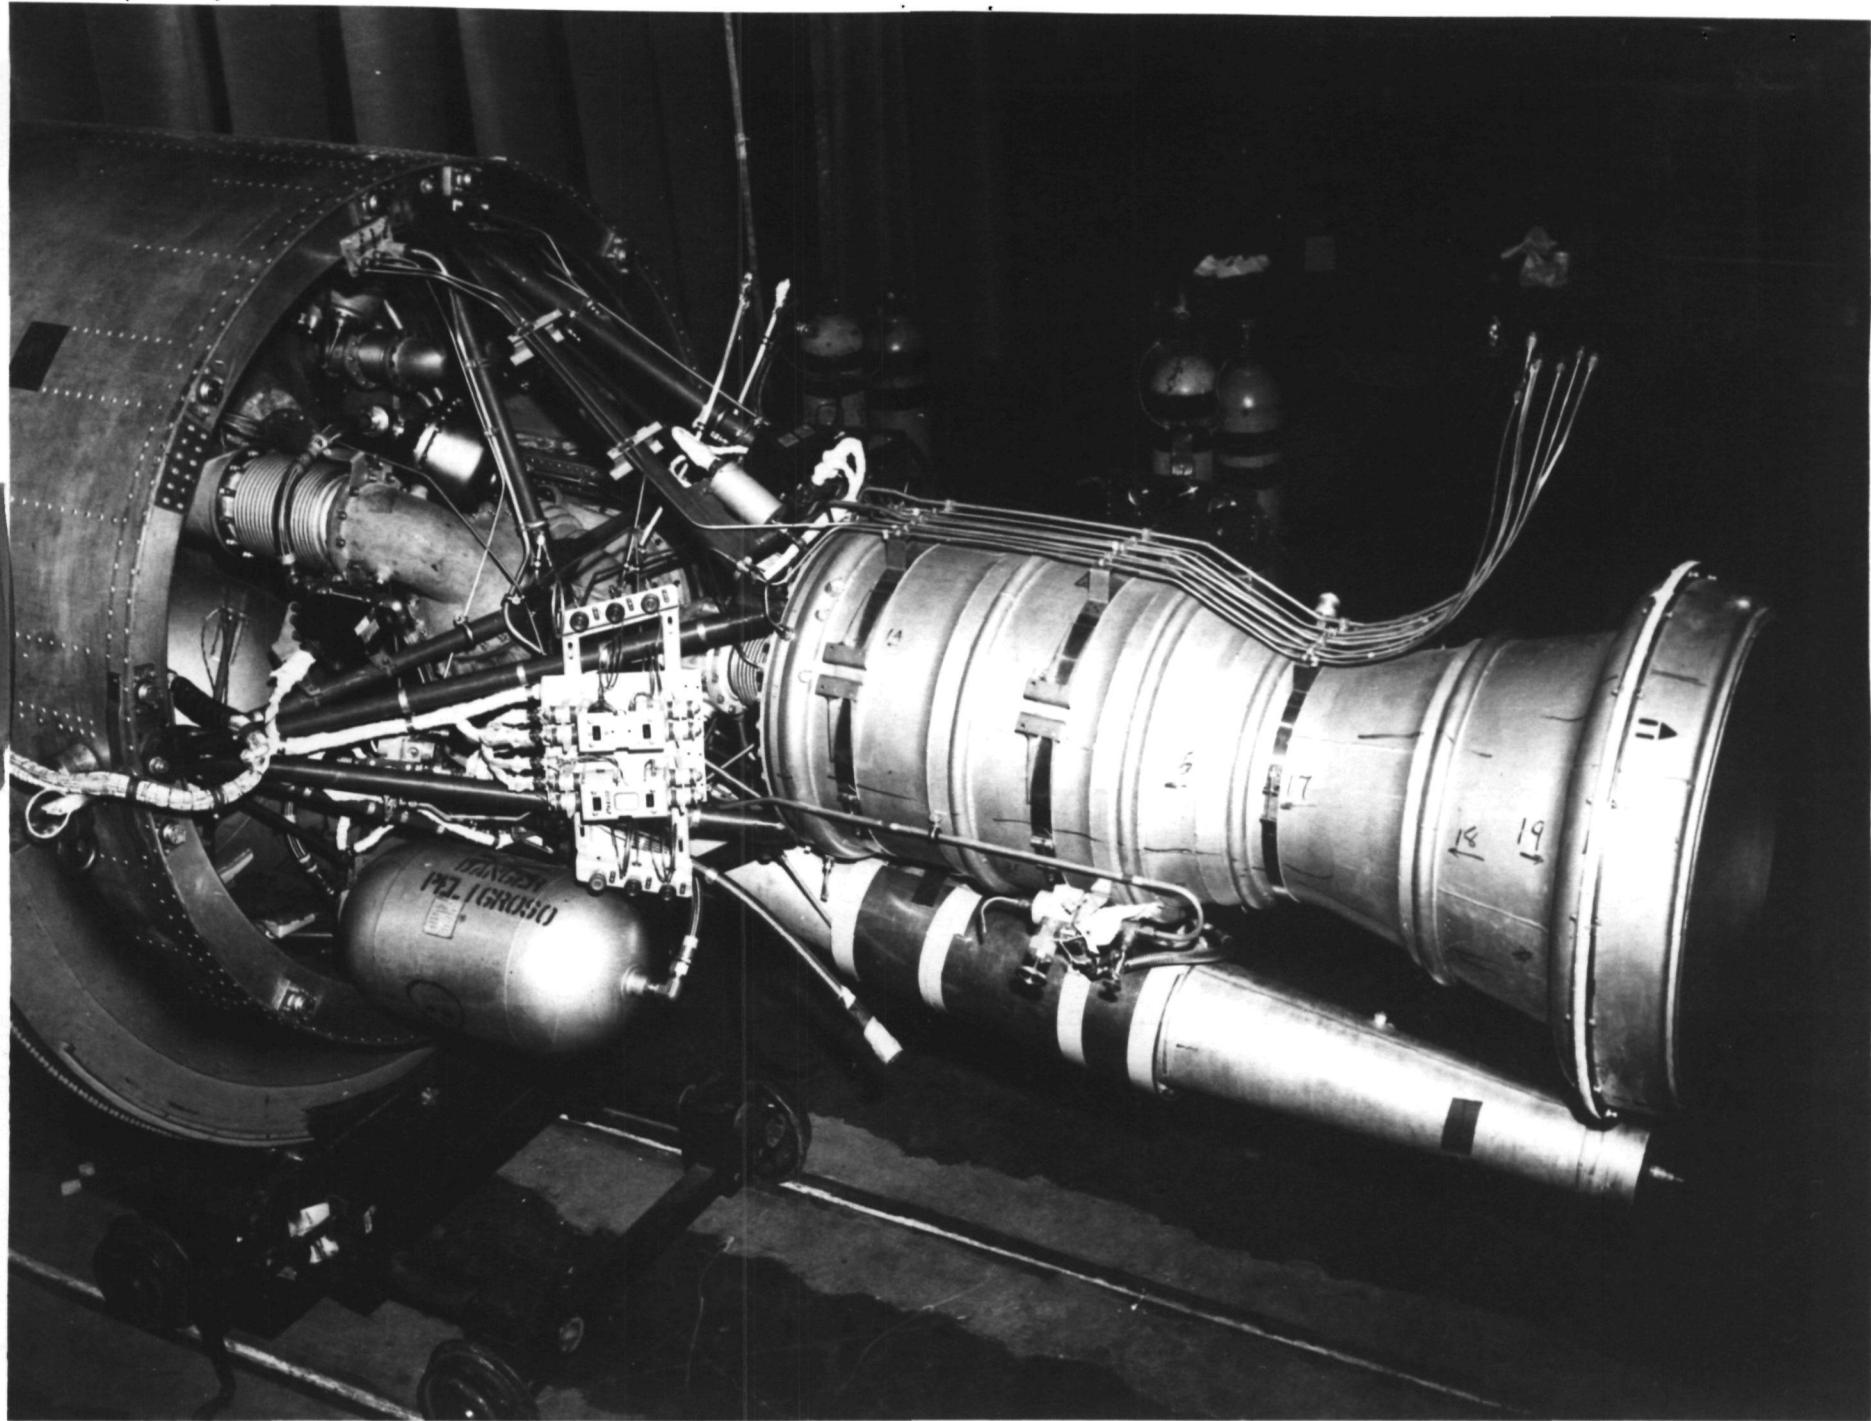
View of A7 engine showing auxiliary H₂O₂ tank.
